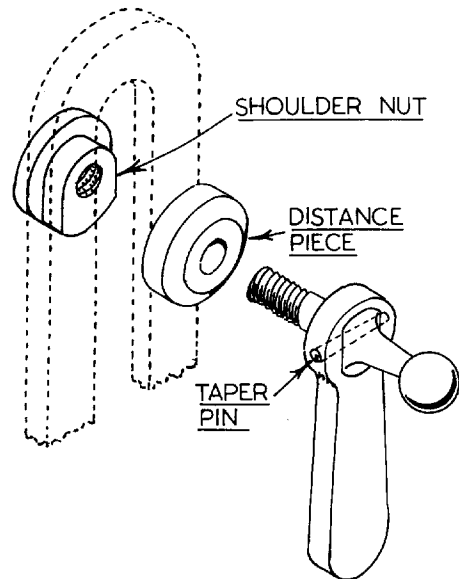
A The Connecting Rod Stroke Adjustment Lock
